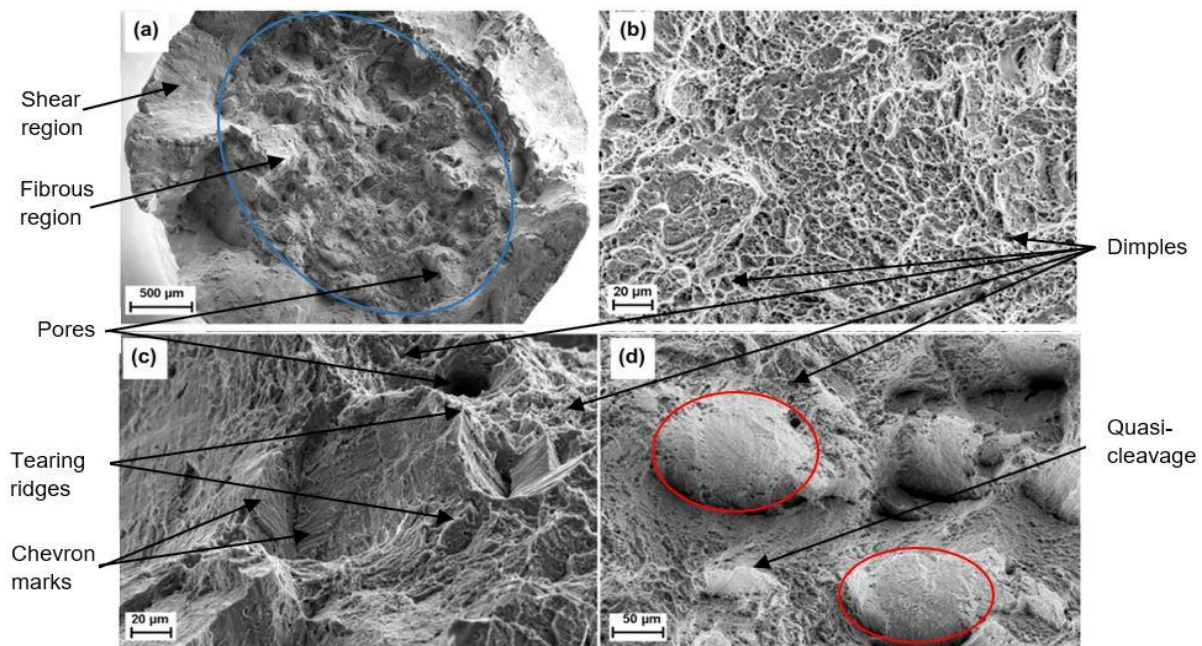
Tensile fracture surfaces of as-built SLM Ti-6Al-4V samples (a) cup-and-cone, (b) dimples, (c) and (d) quasi-cleavage [84]
